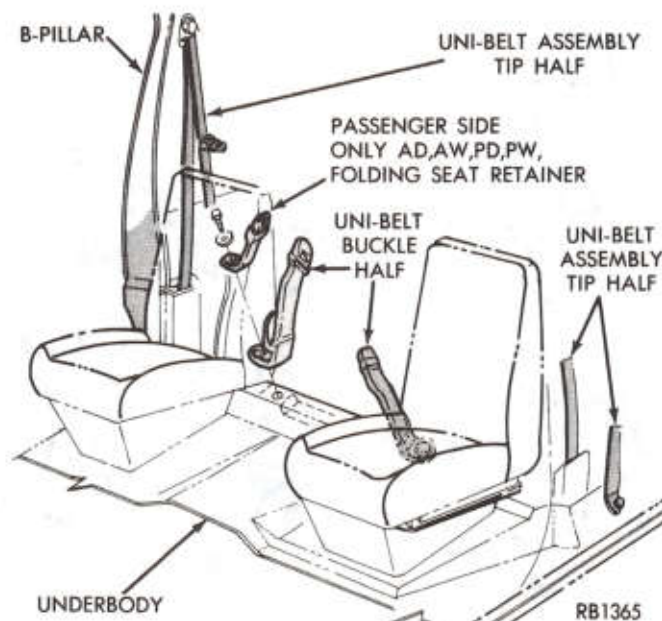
Uni-Belt Front Seat Attachment AD, AW
